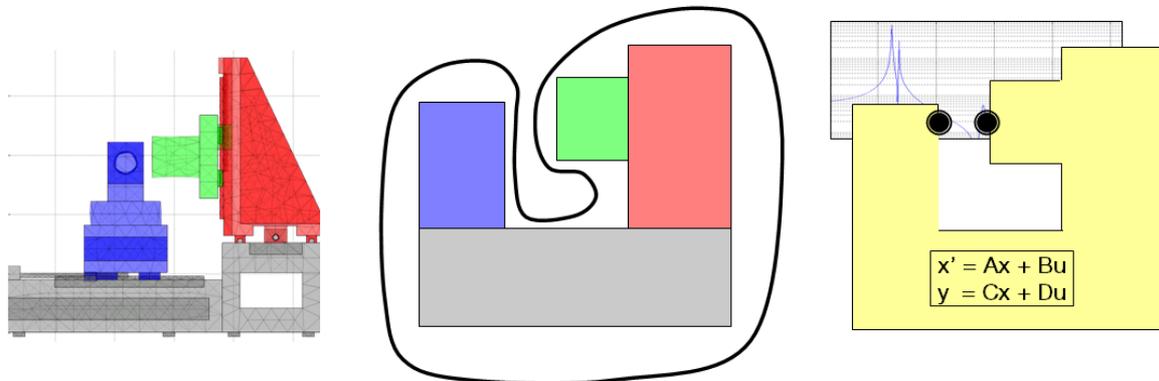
Standard approach consisting in performing a global model order reduction of a machine tool
